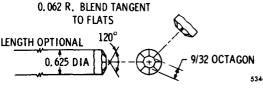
Swaging tool for forward, low- and high-range pinion spindles
